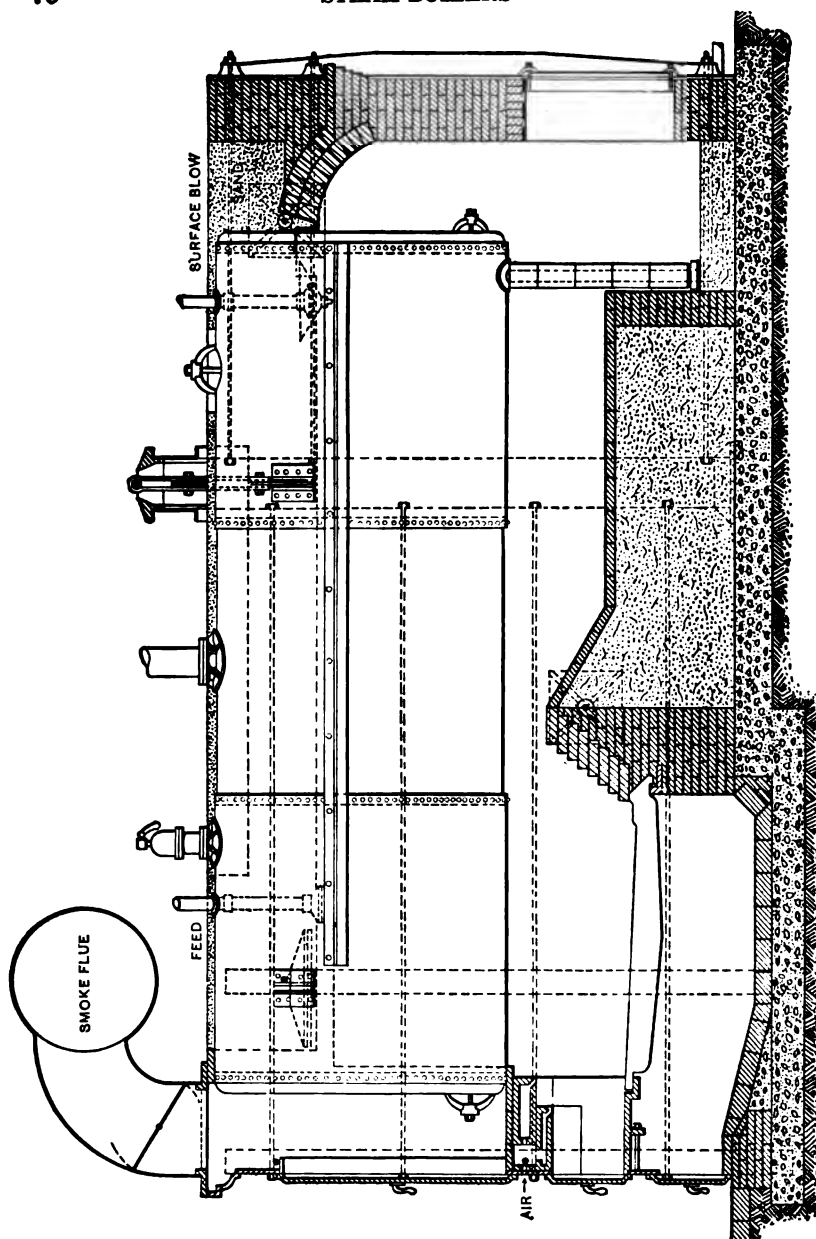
Horizontal Return-tubular Boiler, with a link suspension.
